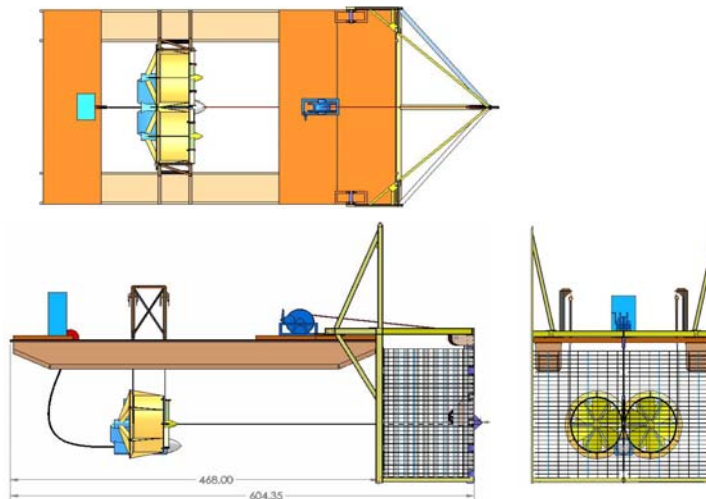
Barge and turbine assembly details including a positioning hoist and electrical enclosure
